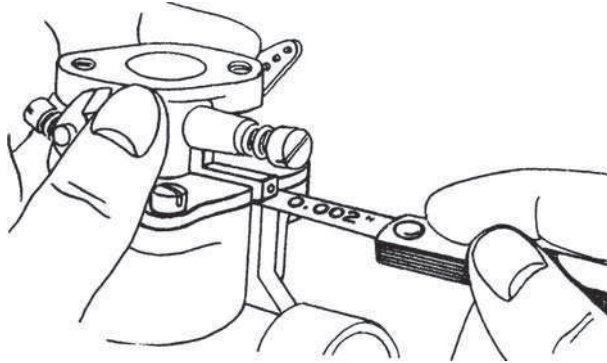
The two-piece Flo-Jet bowl-cover casting (or “throttle body”) is a fragile casting, easily warped by over tightening. Allowable distortion is <0.002 in., as measured with a 0.5-in.-wide feeler gauge. If the gap is excessive, turn the casting over and, using a small hammer, tap the corners back into alignment. Briggs & Stratton Corp.
